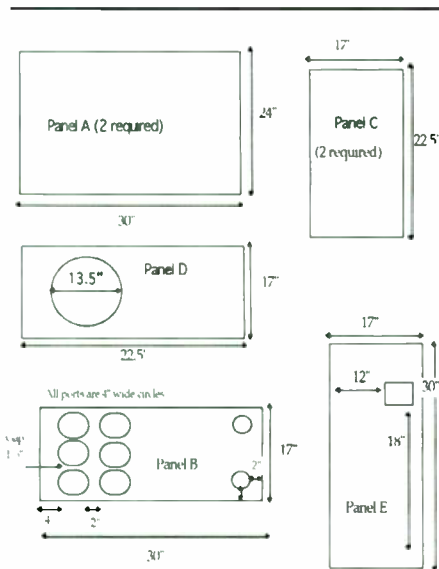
Panels required for construction. All these panels can be cut from a single sheet of 3/4" plywood.
